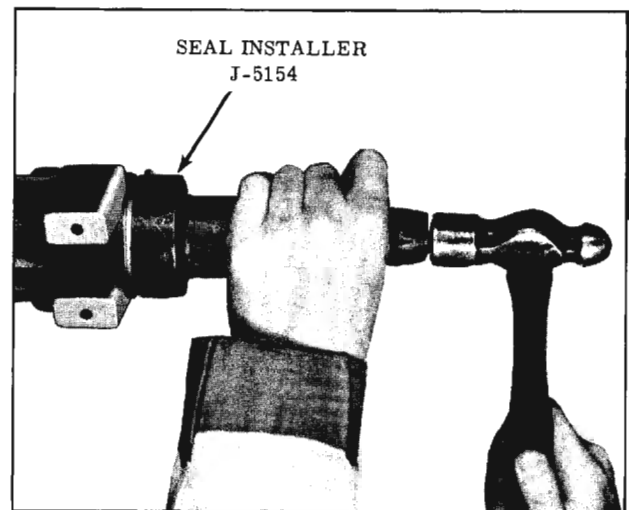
Installing Rear Bearing Retainer Oil Seal
